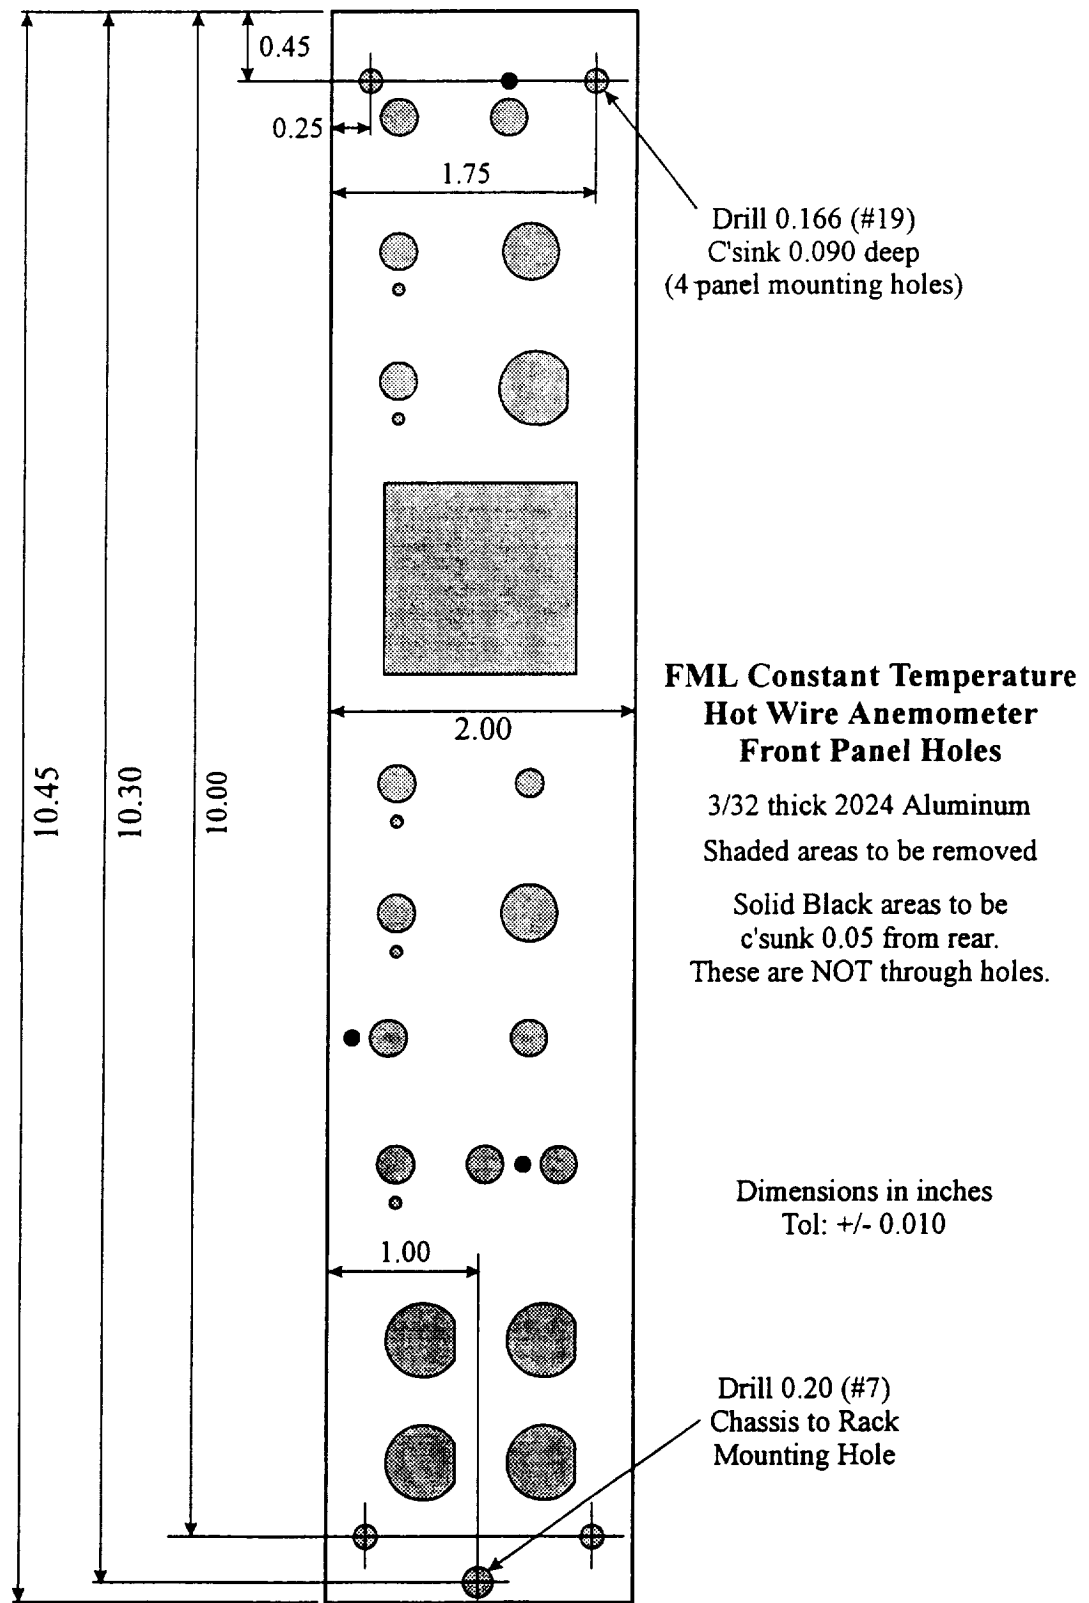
Drawing of front panel holes. External dimensions of panel and position and size of holes for mounting to chassis and rack specified.
